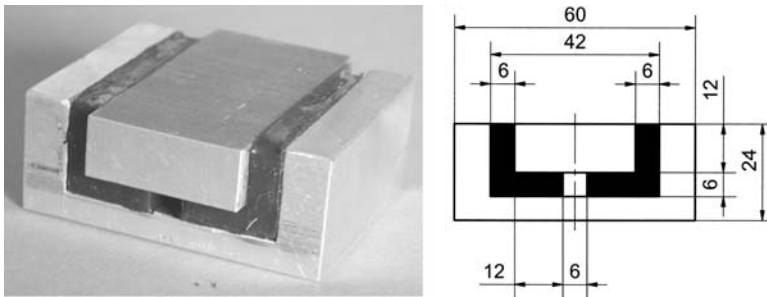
Configuration and dimensions of specimen Type L (dimensions given in millimetres).
